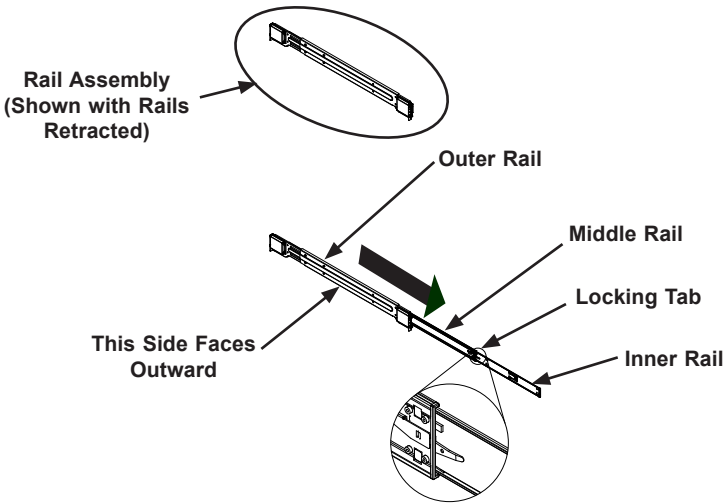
Identifying the Outer Rail, Middle Rail and Inner Rails (Left Rail Assembly Shown)
